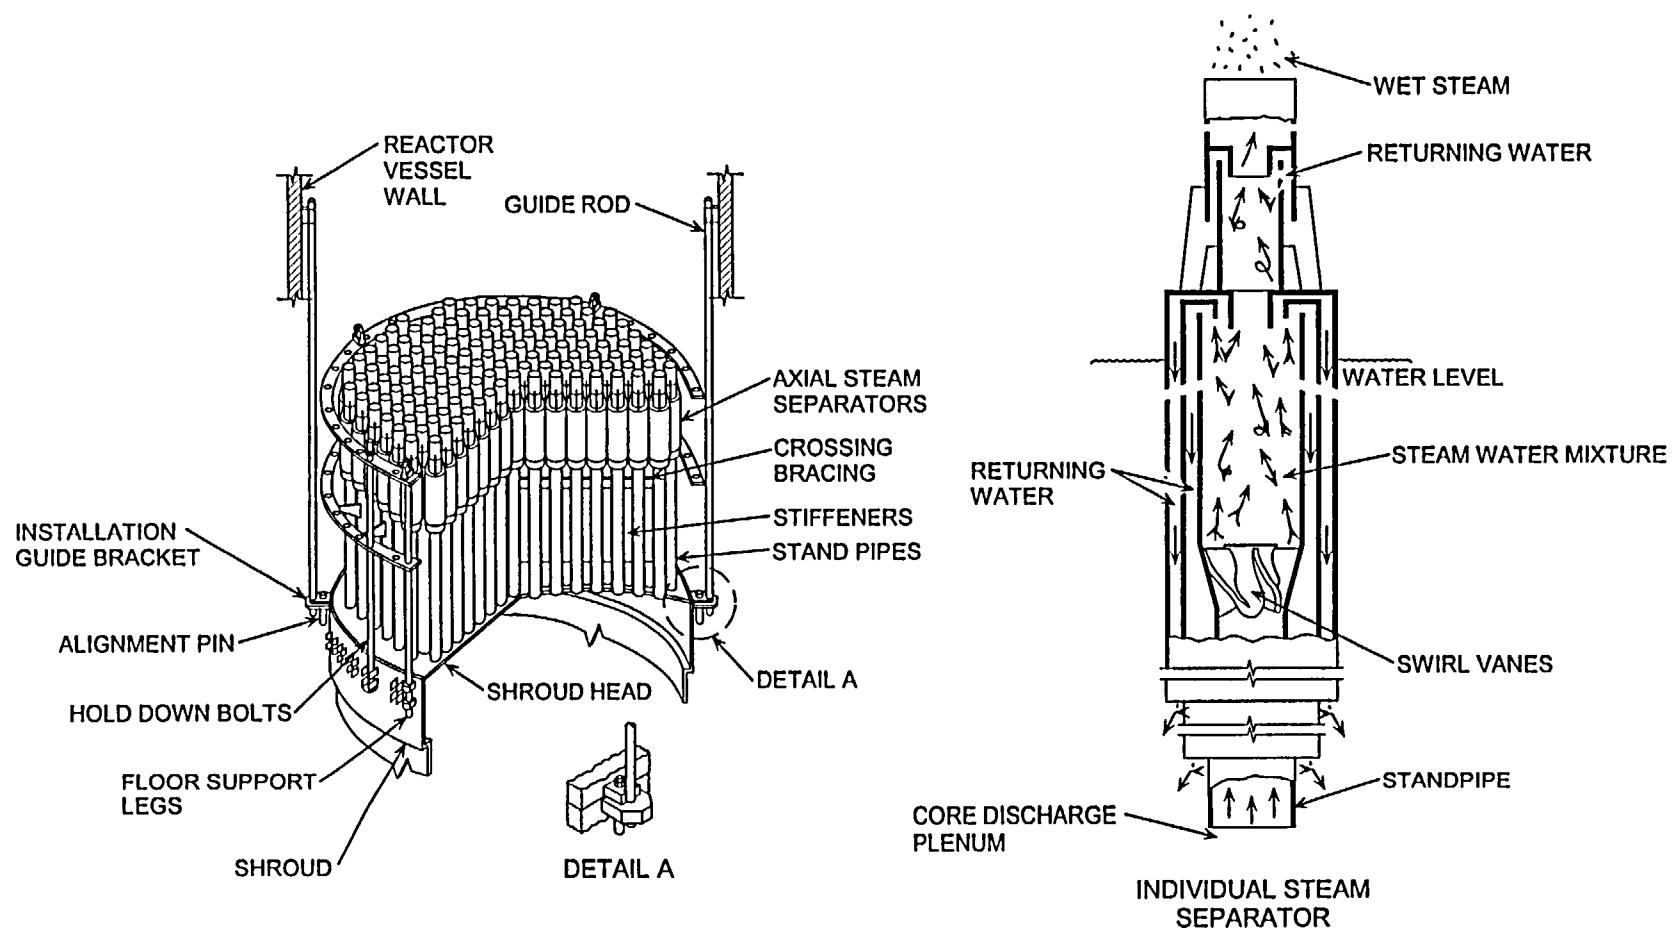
Shroud Head and Steam Separator Assembly
